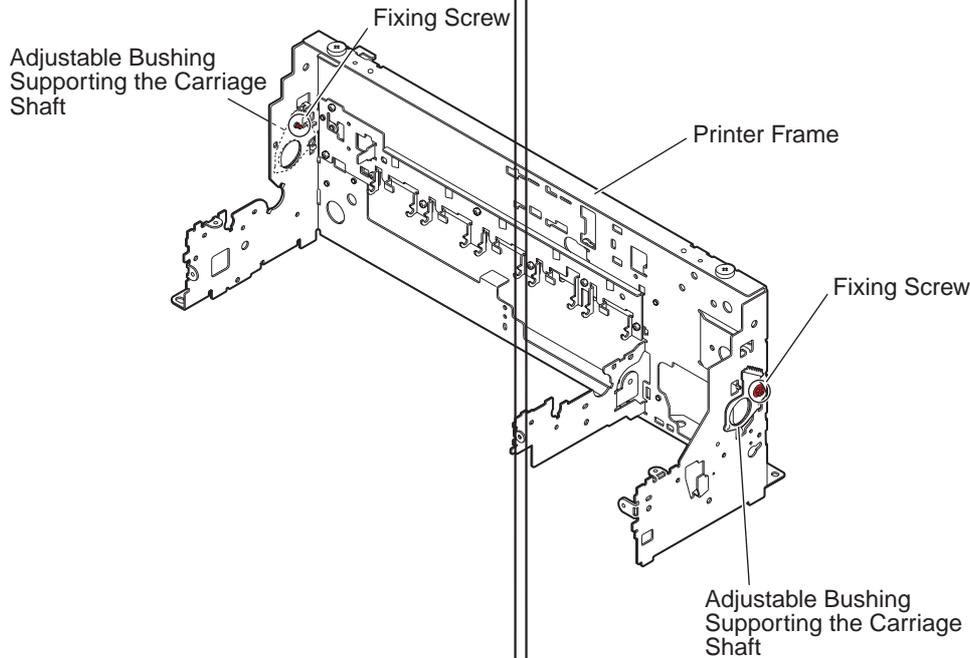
Adjustable Bushings Supporting the Carriage Shaft
